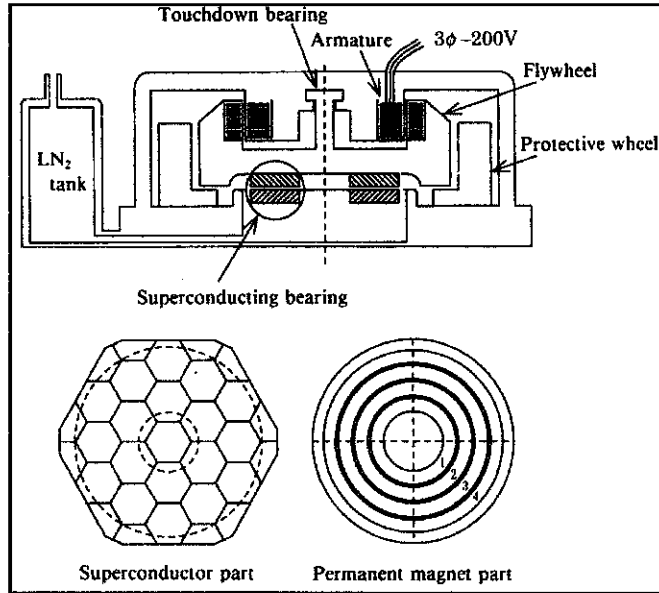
Flywheel system and details of superconducting magnetic bearing assembly (Higasa 1994)
